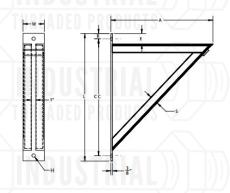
MEDIUM WELDED BRACKET
